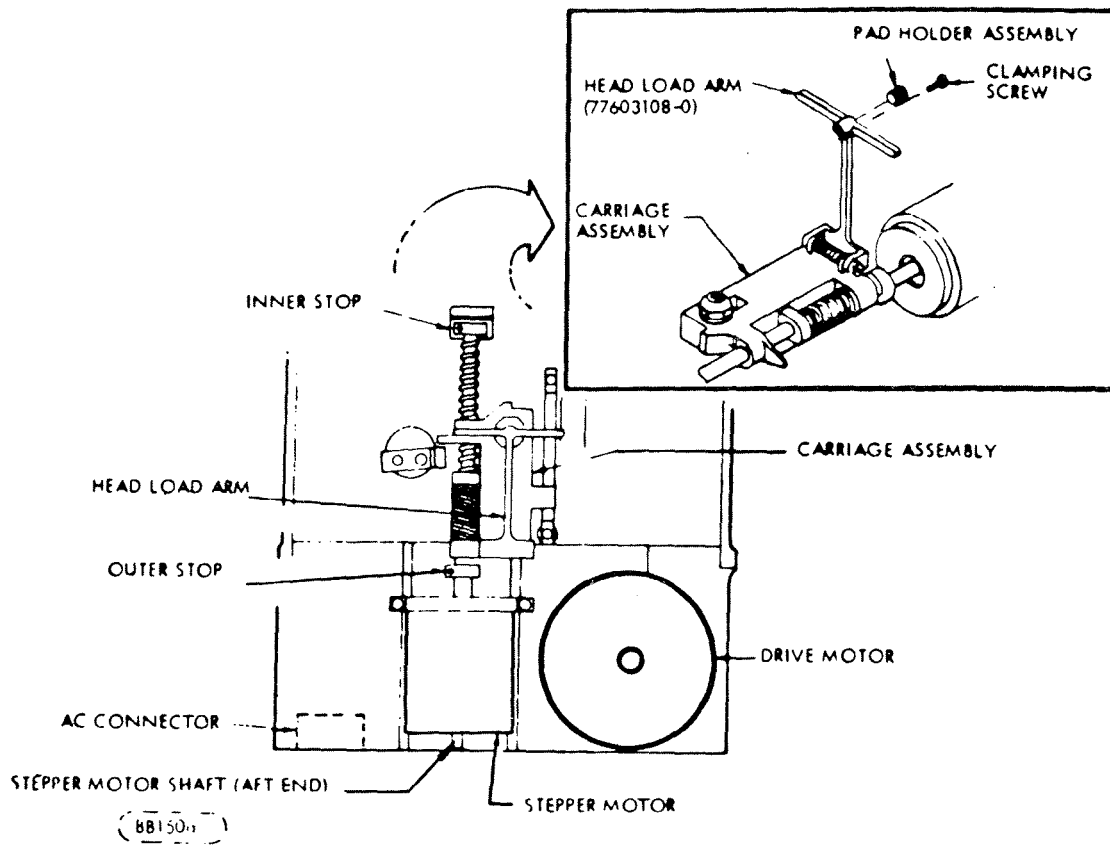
HEAD LOAD PAD REPLACEMENT
